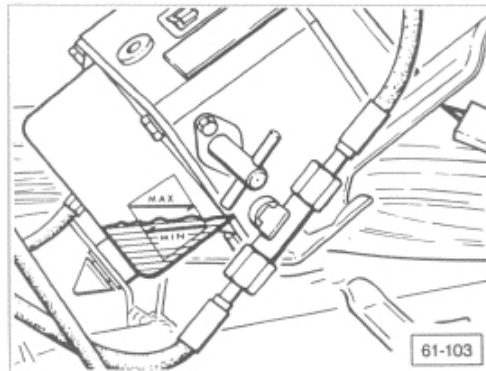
Hydraulic oil level being checked at level indicator on pump housing. Check with top down (open).
